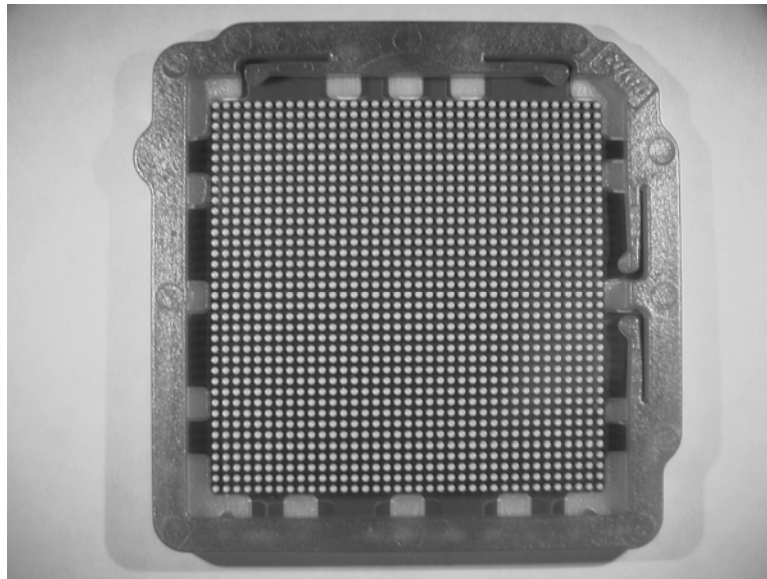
Tyco 1.0 elastomer socket used for the experiment. This design has 1369 contacts arranged in a 37x37 array. The socket is 55mm wide and 57mm long
